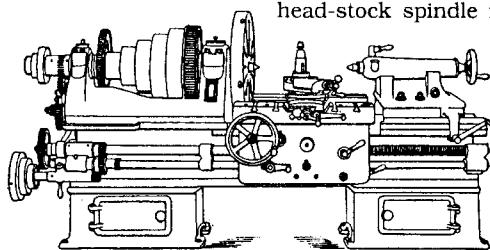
24-inch Swing Engine Lathe built by the R. K. Le Blond Machine Tool Company.
